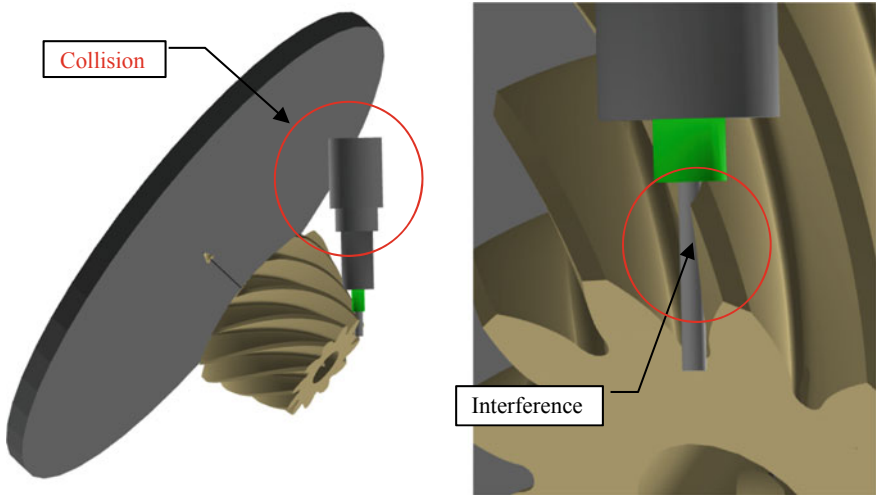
Toe chamfering with EM—spiral bevel pinion
